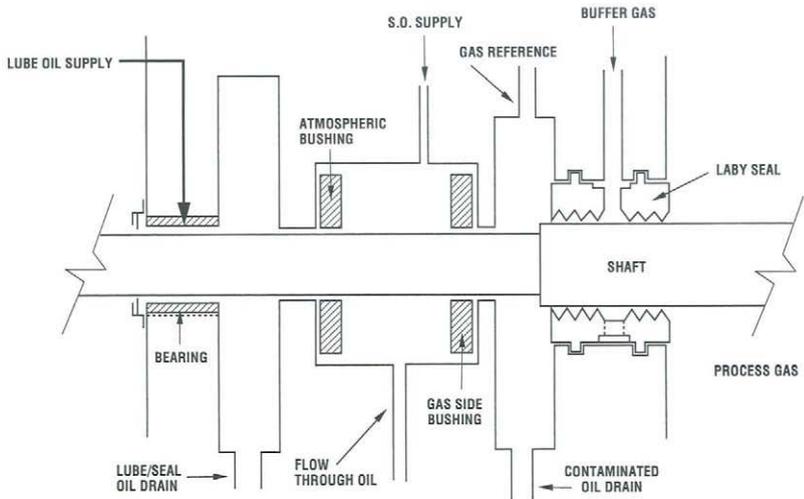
Bushing seal schematic (Courtesy of M.E. Crane Consultant)
